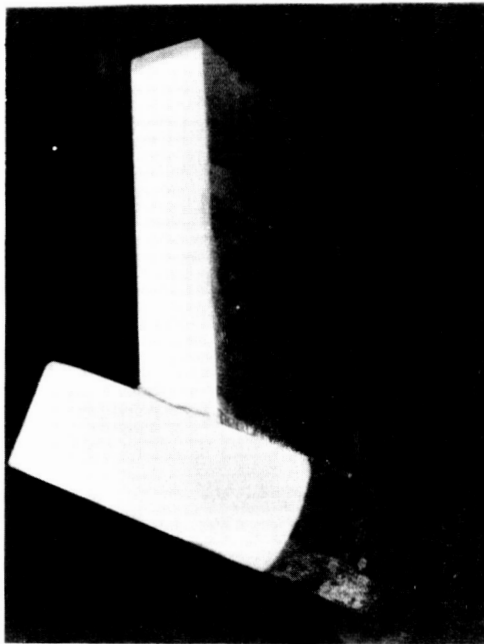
MONEL K-500 WELDMENT MADE BY ELECTRON-BEAM WELDING (REF. 53)
